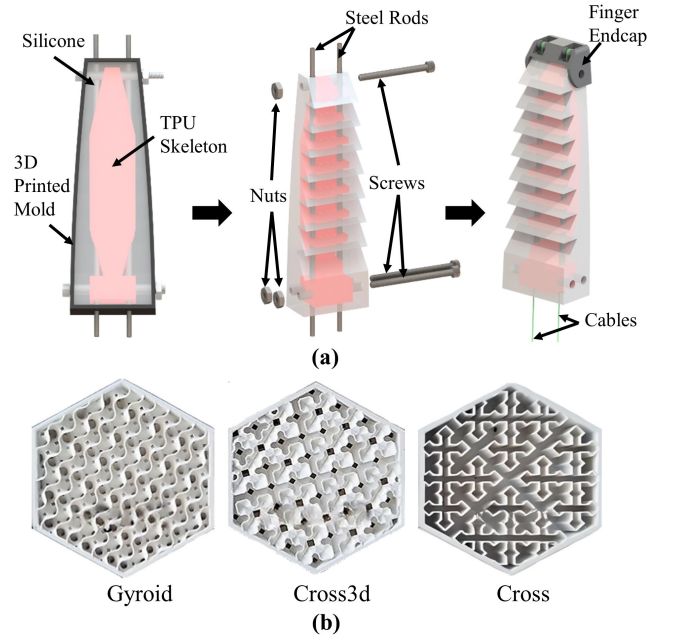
Soft Finger Components. a) Fabrication process for a single soft finger with a TPU skeleton. Silicone was cast into a mold with a TPU skeleton and steel rods to create a cavity for the cables. The rods are removed and cables are inserted to create bending motions. b) TPU Skeleton Patterns. Three types of TPU patterns (Gyroid, Cross3d, and Cross) were tested for the gripper design.
